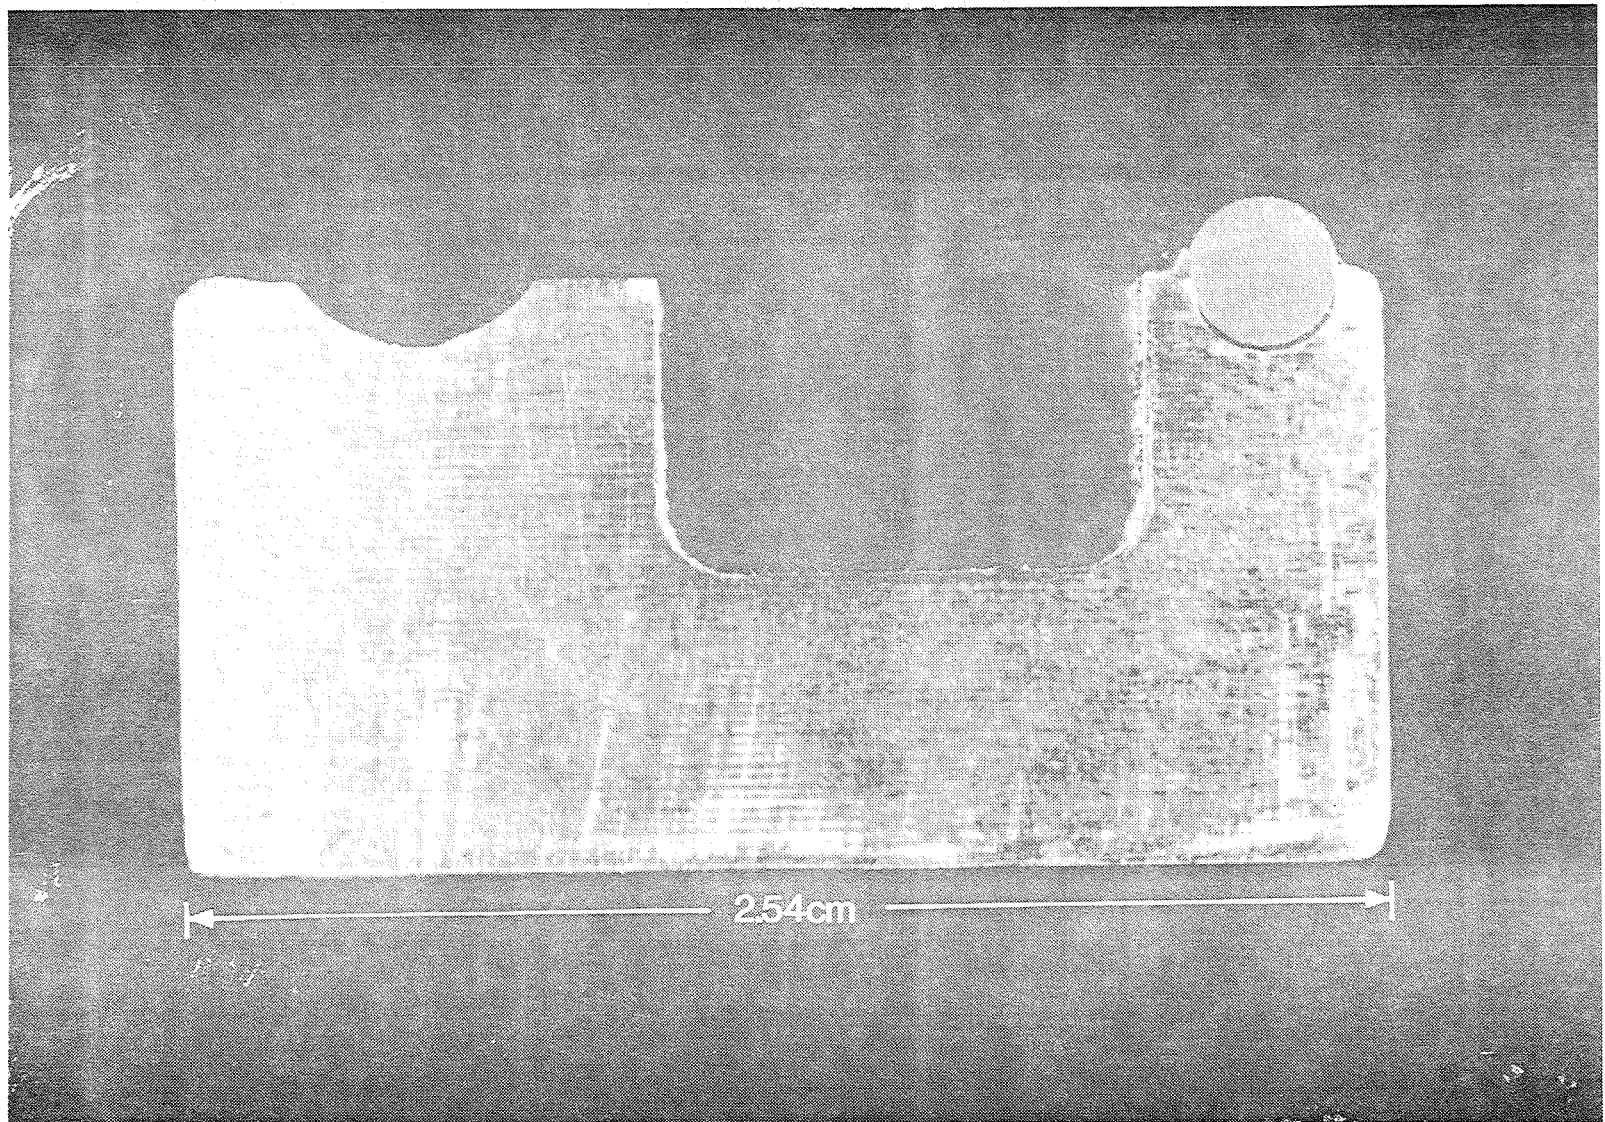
Close-up cross sectional view of the mounting brackets for the panels.
